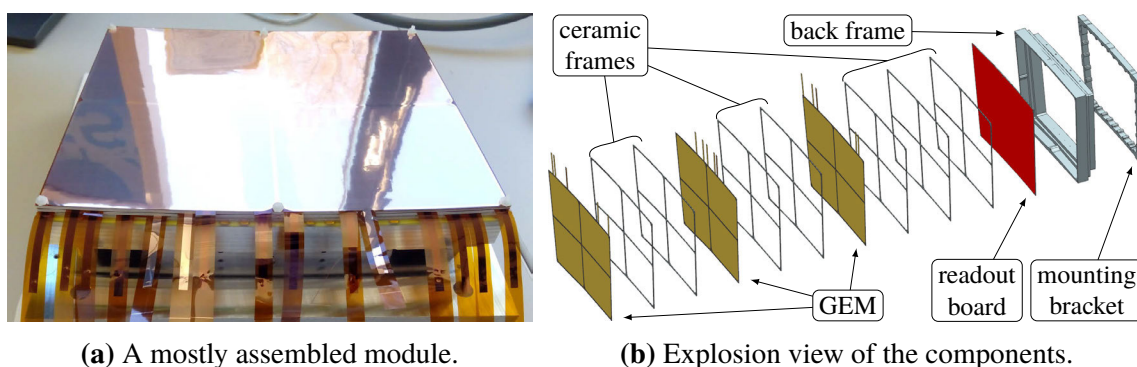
Overview of the GEM readout module. In (a) a photo is shown of an assembled module, before the GEM HV connections were trimmed and soldered. The explosion view in (b) shows from right to left the mounting bracket and aluminium back-frame in grey, the readout board in red, the GEMs in yellow and in between the GEMs the ceramic frames they are mounted on.
